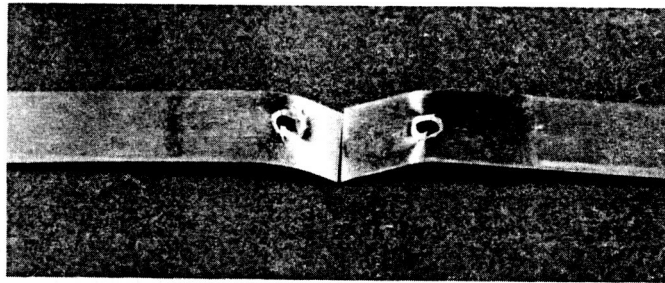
Spot welded Nitinol showing nugget torn from strips during typical shear failure
